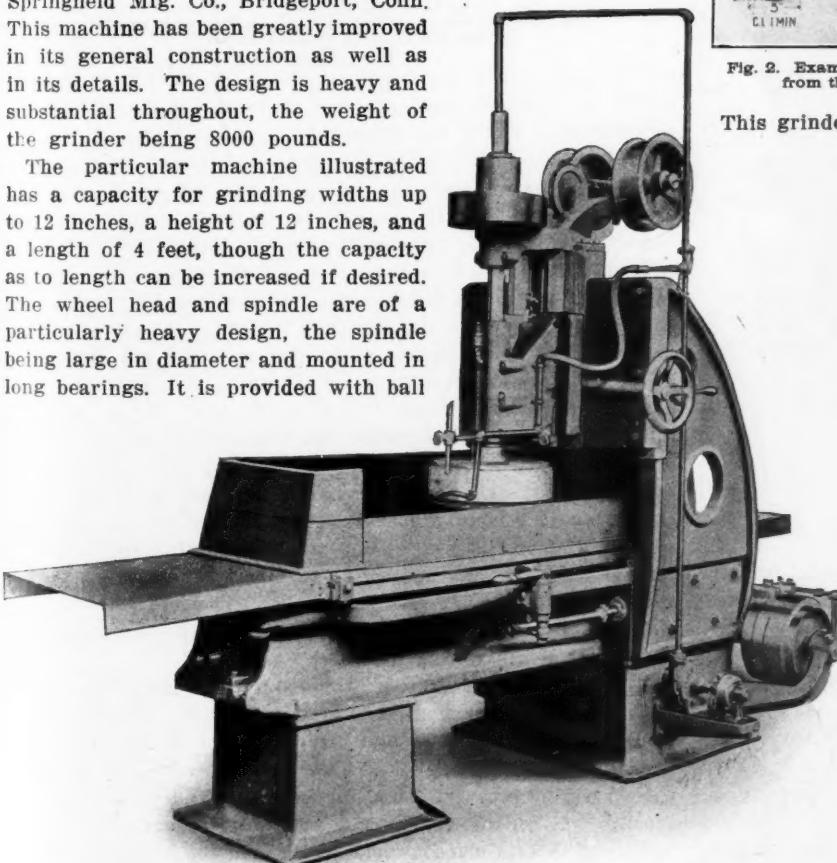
Grinding Planer built by the Springfield Mfg. Co.
